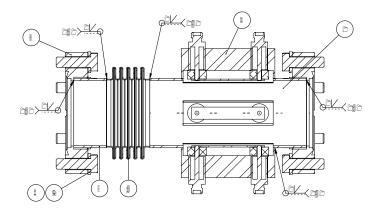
Rotatable flanges welded to the right side of beam pipe, and welded to left side of bellow.
